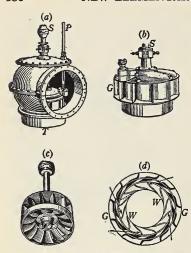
The turbine wheel: (a) outer case; (b) inner case; (c) rotating part; (d) section
